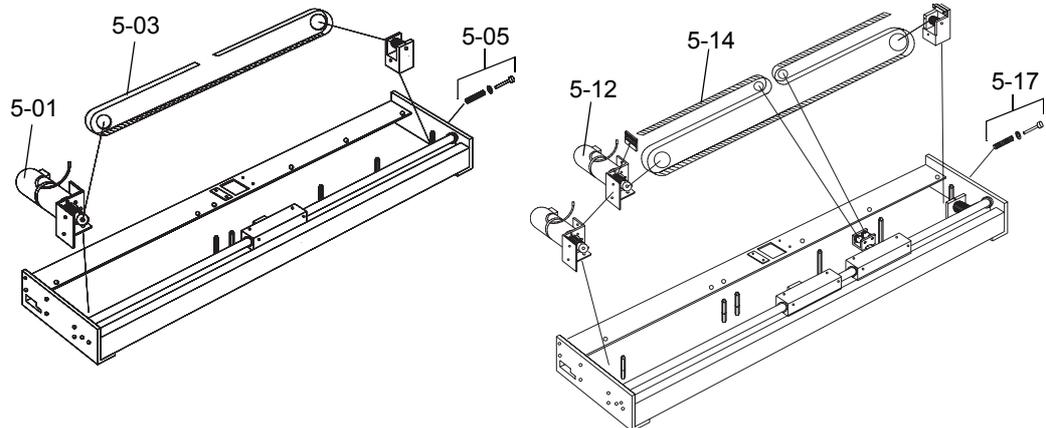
Spare parts X-drive assembly LiHa (left) and RoMa (right)
